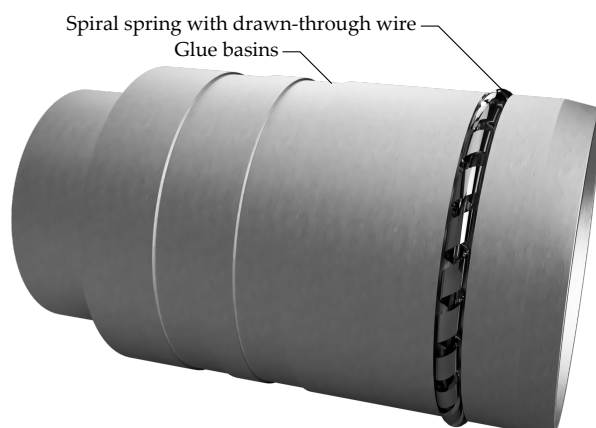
Modified design of the straw endpieces. To ensure adequate electrical contact a spiral spring is held in by a wire in the groove originally designed as a glue overflow basin. Two additional glue basis are added.
